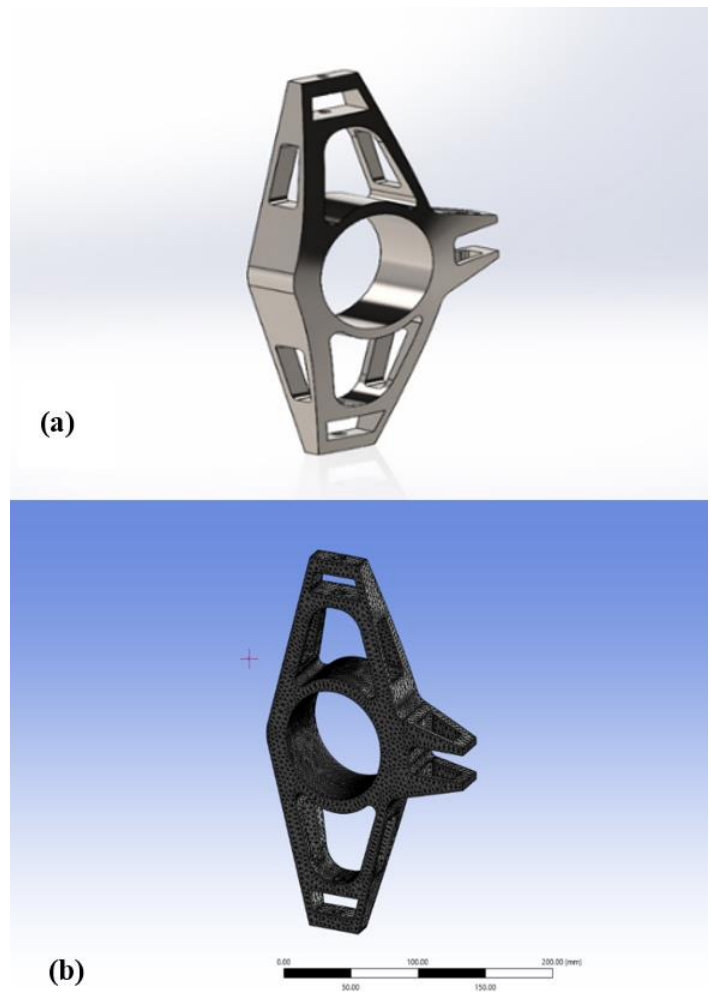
(a) Isometric View Model Z; (b) Mesh grid section view of Model Z
